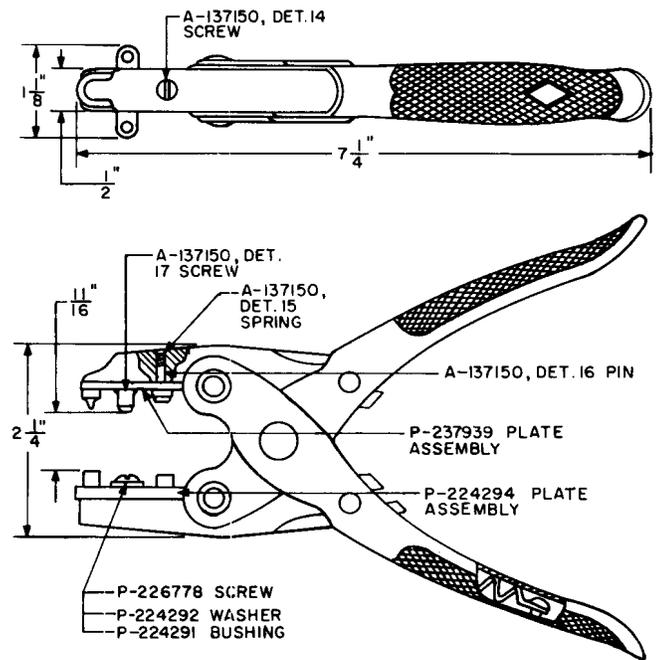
345 Jack Sleeve Remover and Replacer Tool
